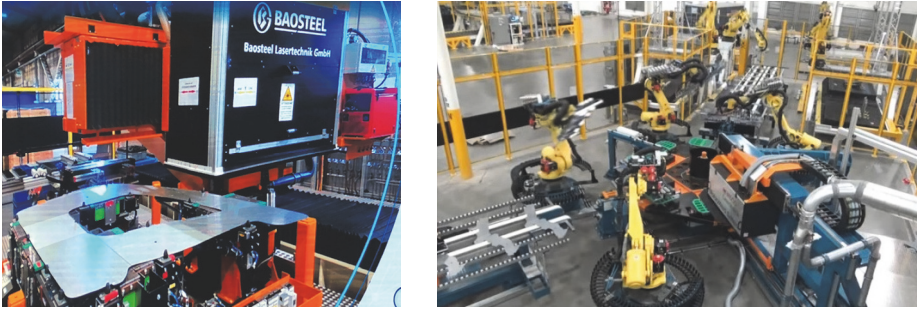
High-performance door ring welding plate automatic production line
